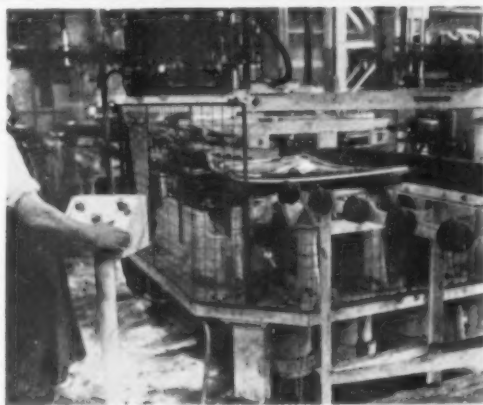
General layout of hood and luggage compartment door assembly lines, both of which incorporate clinch and/or clinch/multi-weld fixtures
